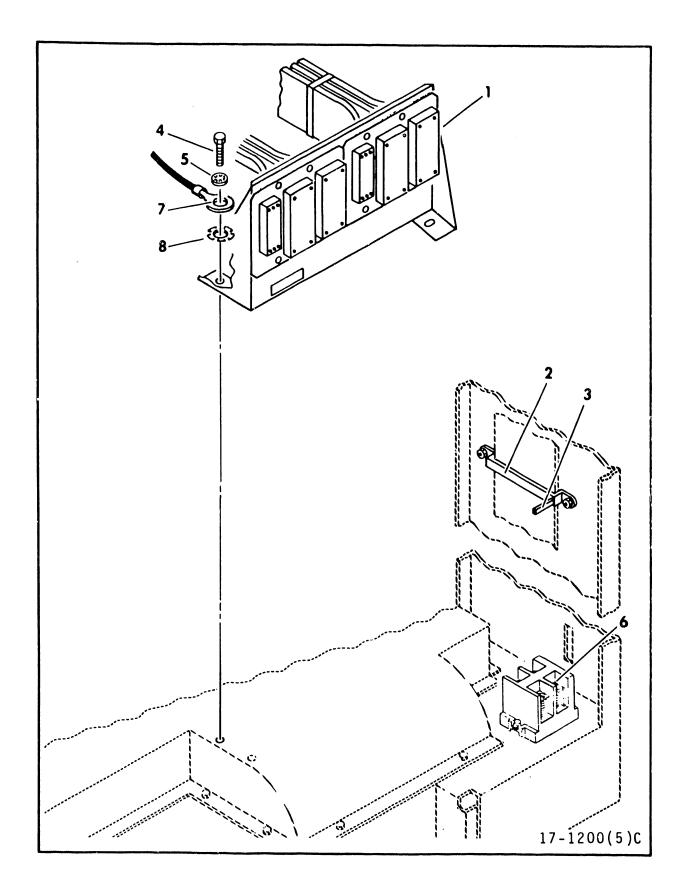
A-12. Frame & Air Assembly(Sheet 5)
